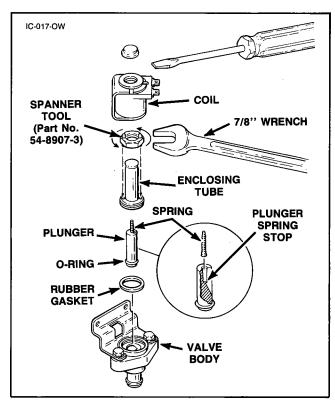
WATER DUMP VALVE DISASSEMBLY
